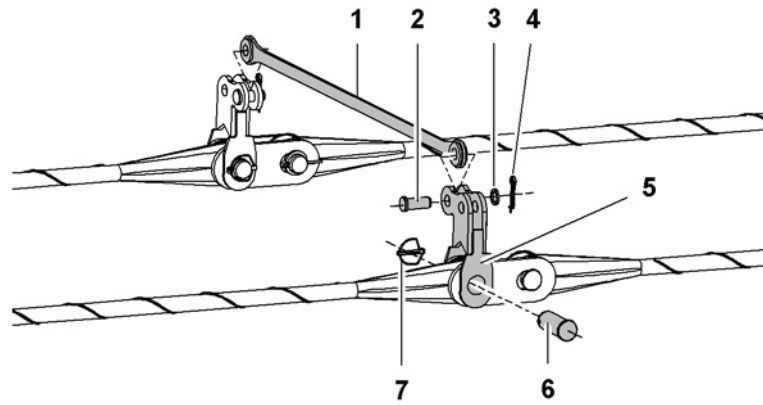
Fit connecting elements and spacer brackets on the backstay straps
